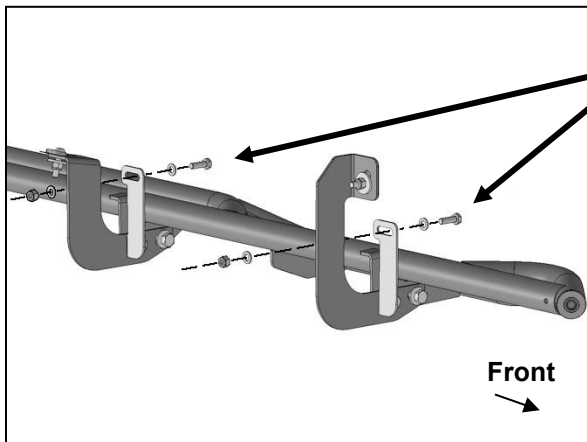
Level and adjust the Running Board to the vehicle. Mark and drill 5/16" hole through pinch weld for each Support Bracket (arrow). Driver/left front Bracket pictured for example
